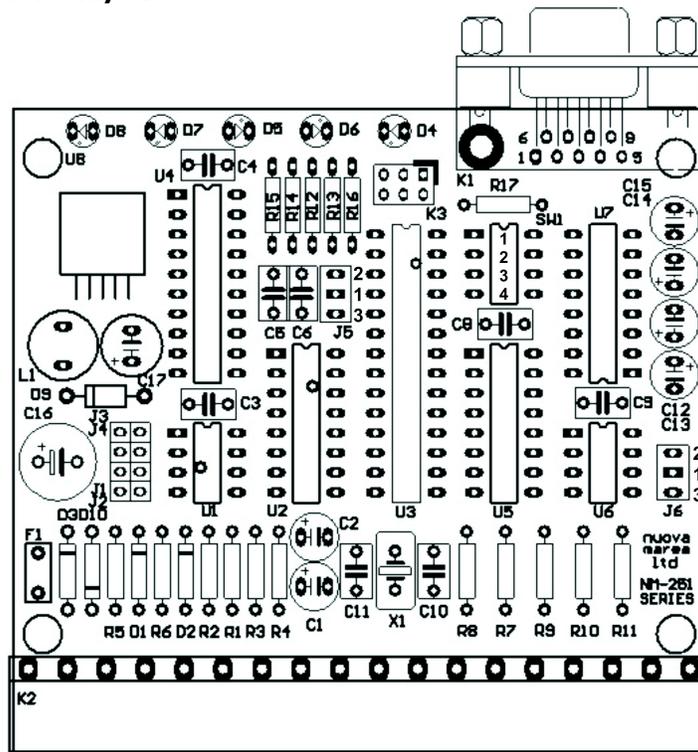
Composite layout of NM-251D-ZDA printed circuit board
